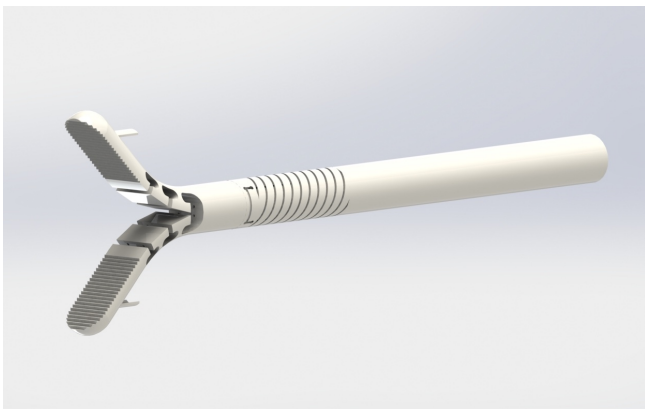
3D drawing of the shaft, flexure, and grasping forceps.
